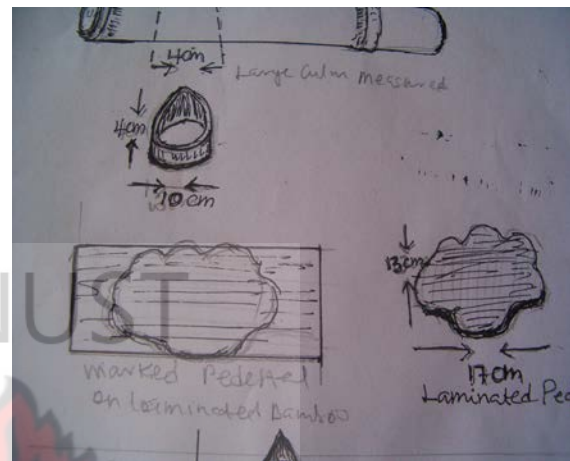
stages 3 and 4 of design process of Multi-Purpose holder
